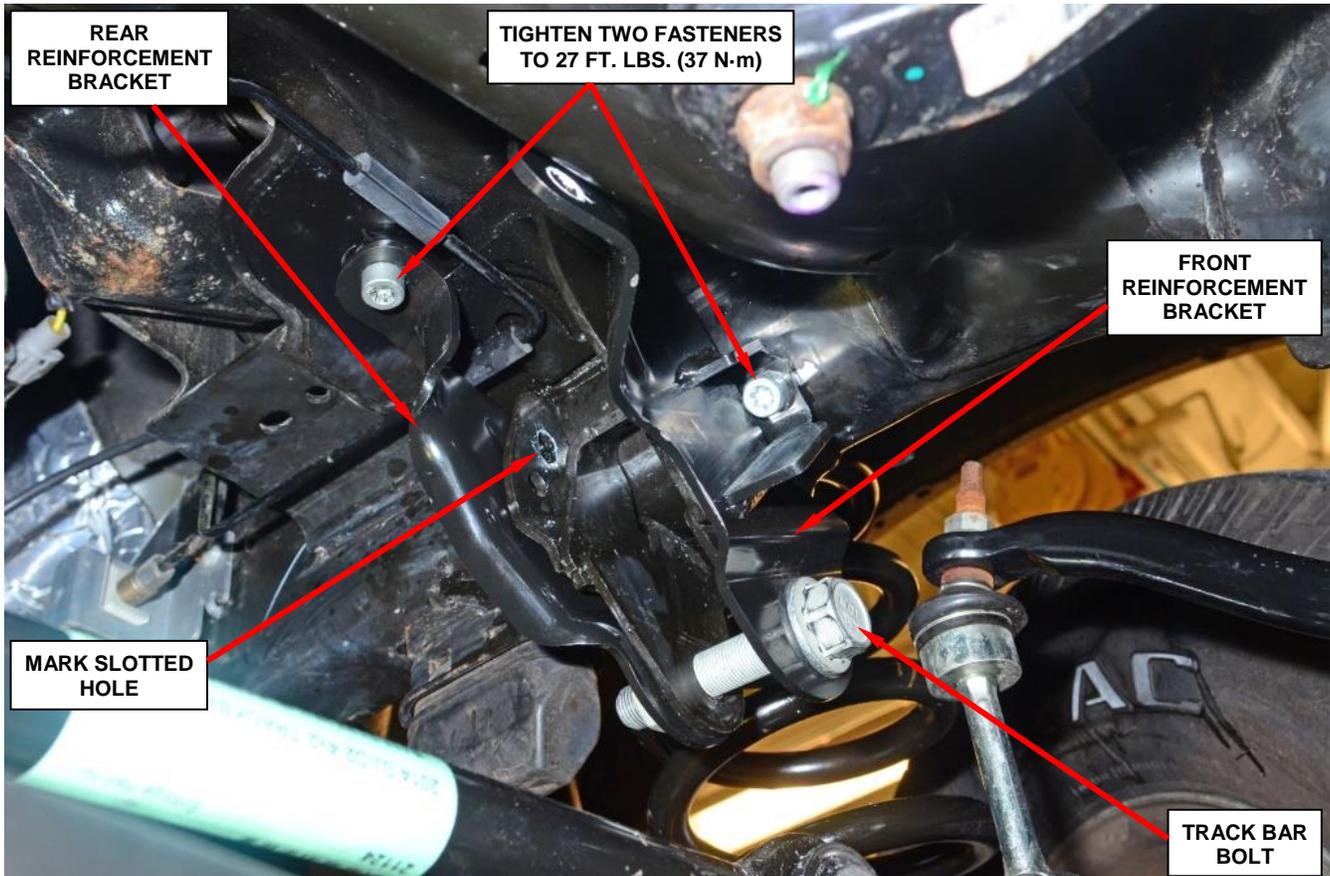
Install and Tighten Two M10 Fasteners / Mark Slotted Hole
